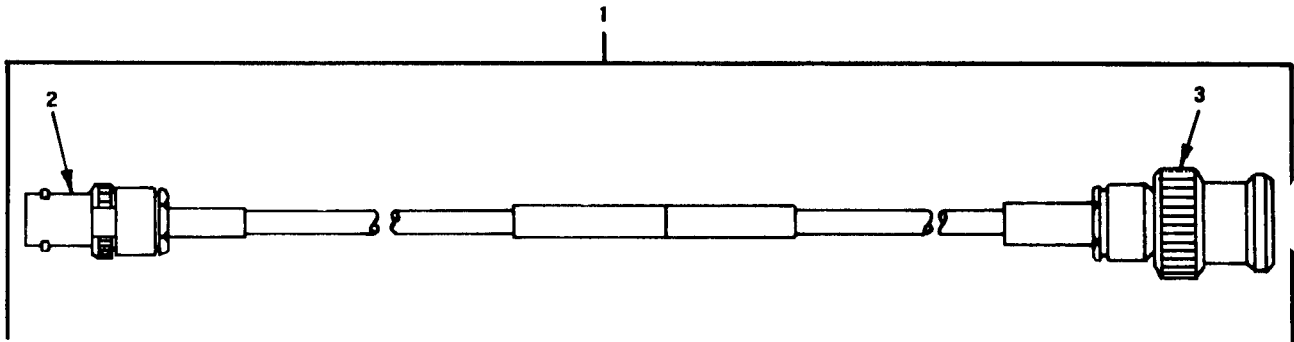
Adapter cable assembly W9C (467-117-001) and W9D (467-118-001)
